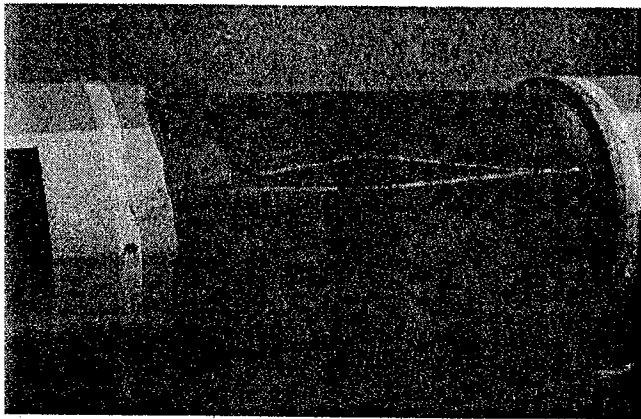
Longitudinal Weld Seam Failure in Sample B2
